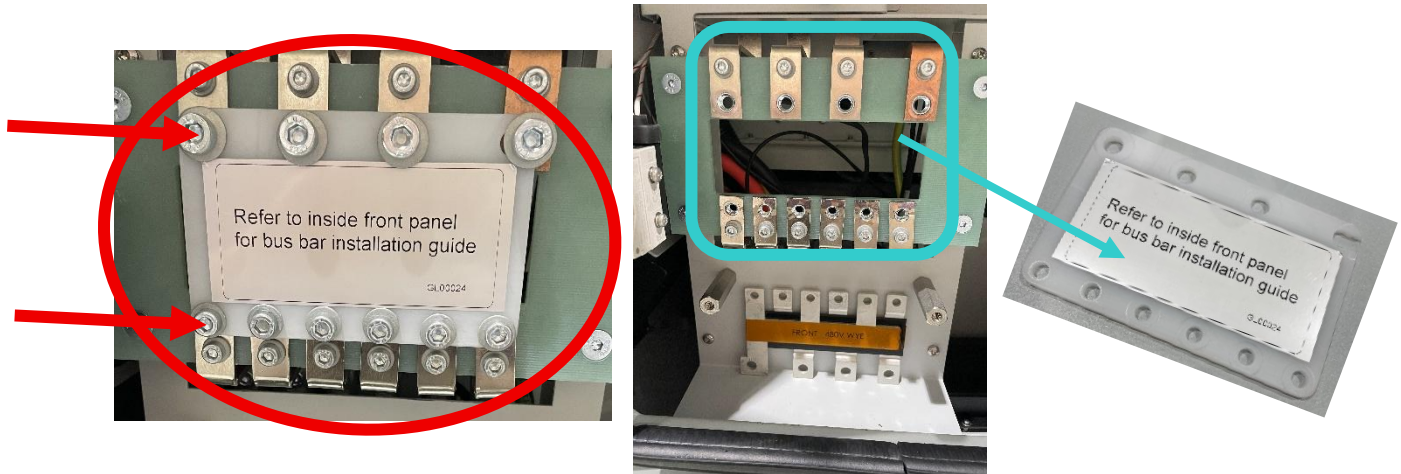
M6 and M8 socket head cap screws must be removed to remove plastic spacer plate
